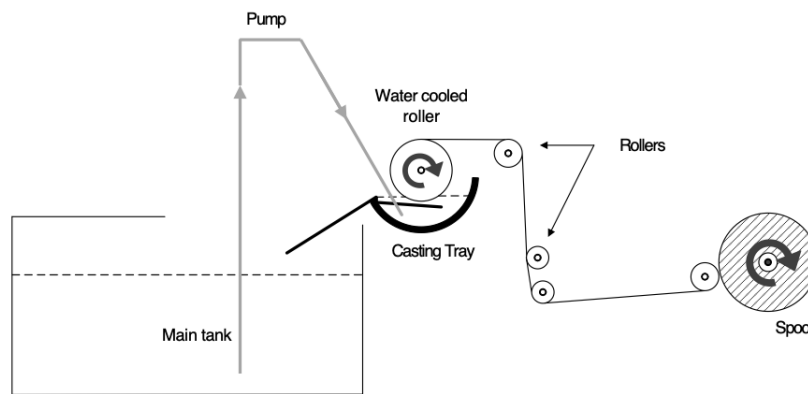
Schematic diagram of single drum continuous casting process for sheet lead manufacture
